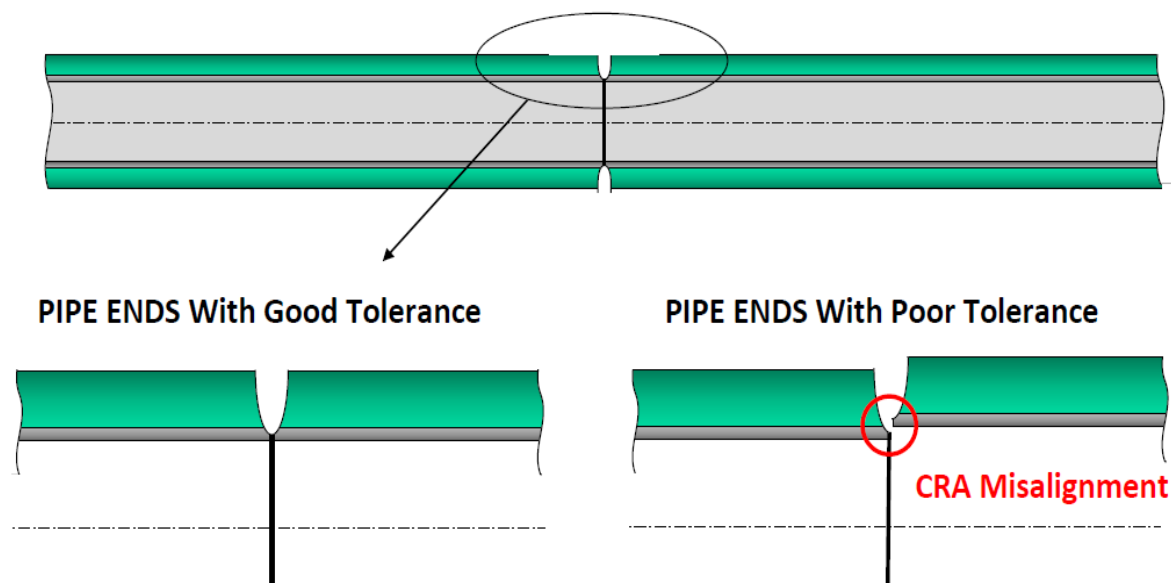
Welding misalignment between adjacent pipes.
